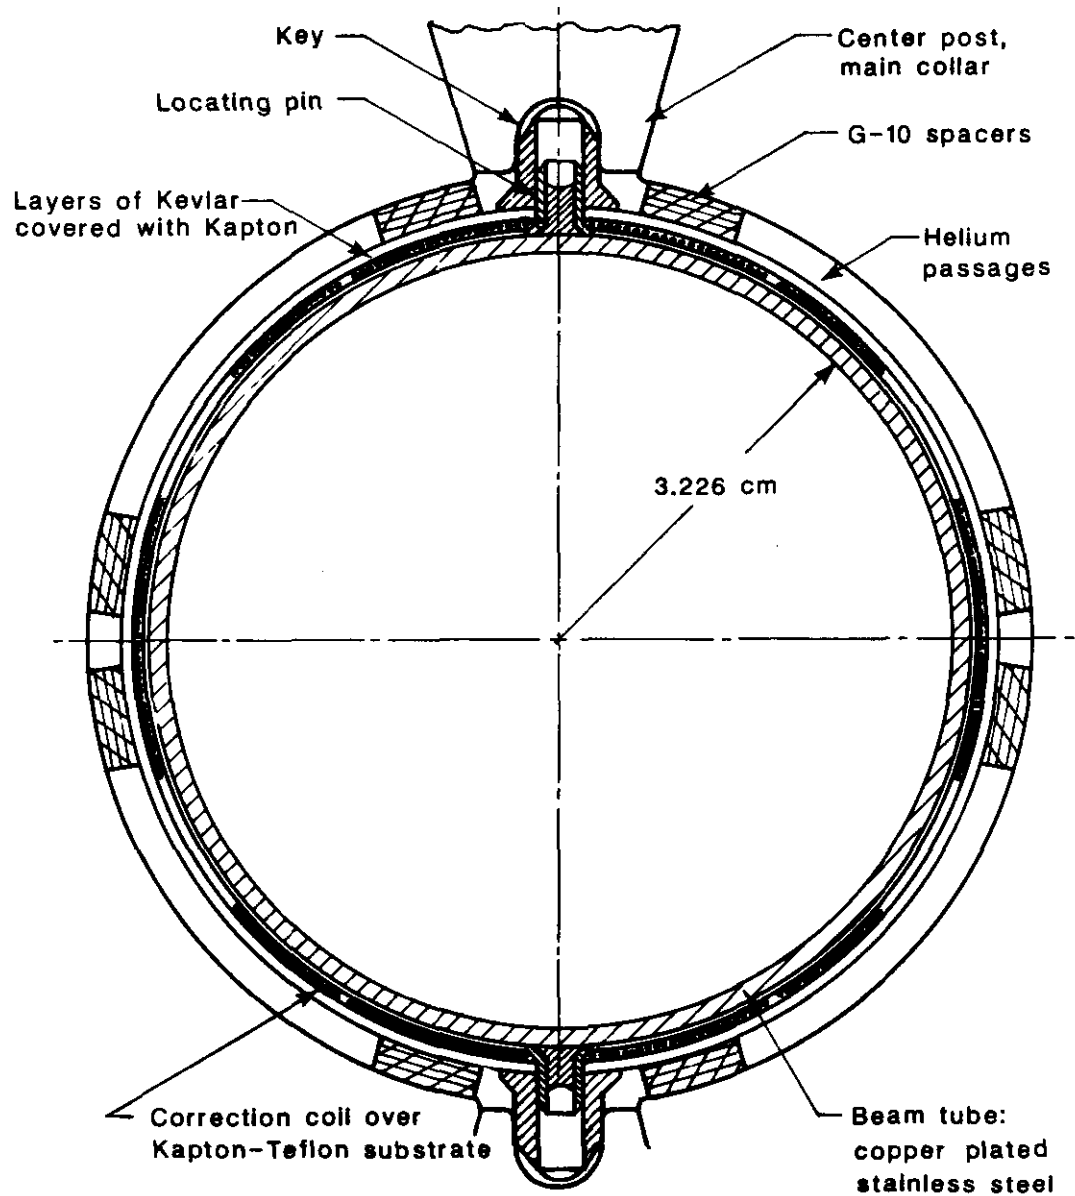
Dipole bore tube assembly, including sextupole trim coil.
